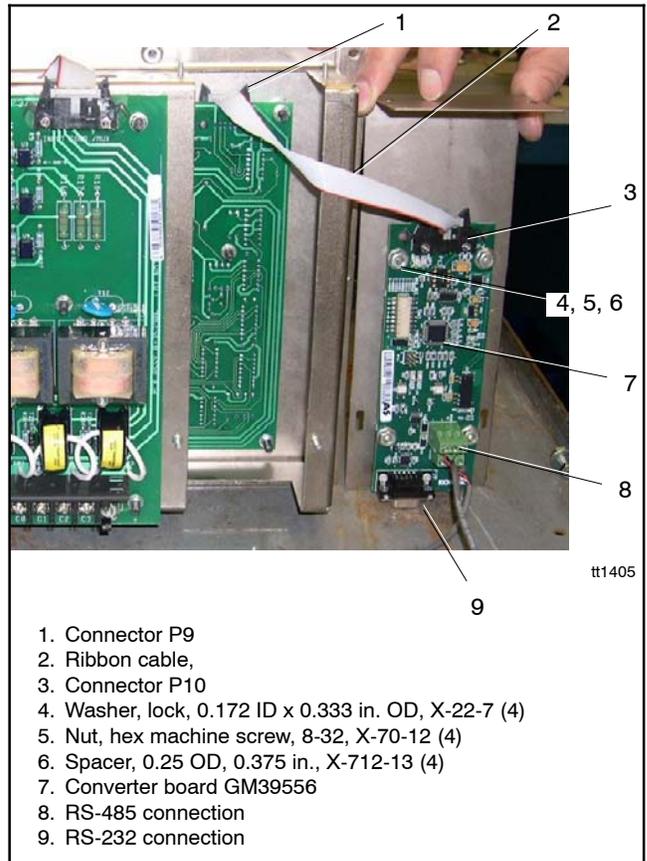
Converter Module Installation Details for ATS Controllers With Load Shed Accessory 35N
